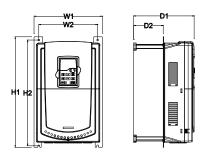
Wall installation of 380 V 220-315 kW VFDs
